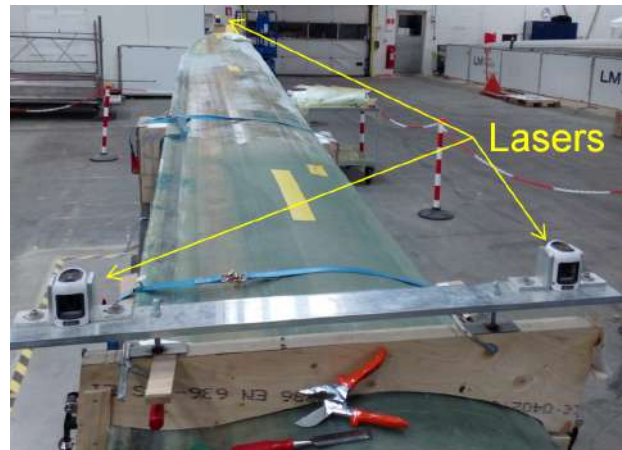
Picture of Hyller tip on six axis manipulator with three lasers mounted.
